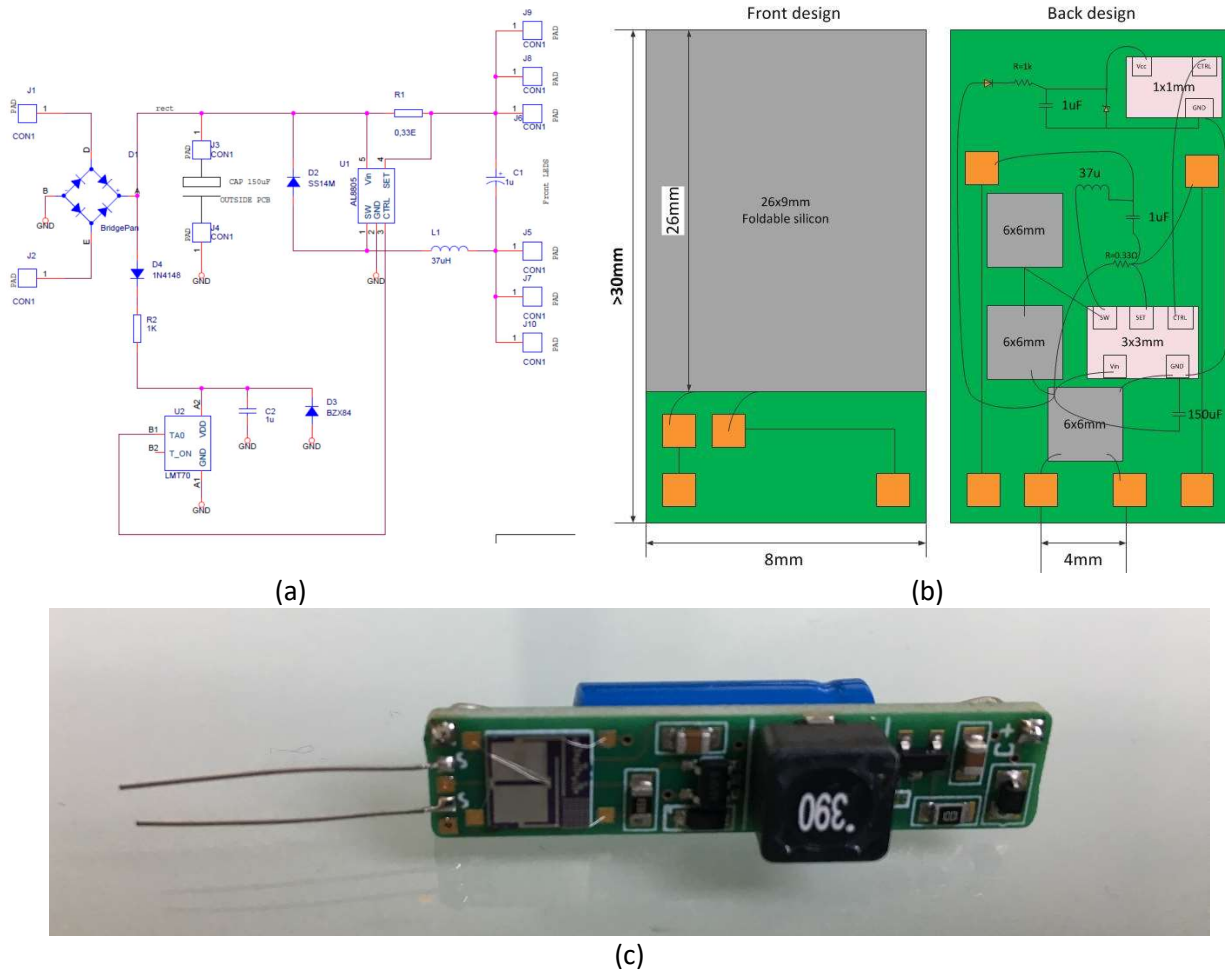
(a) Circuit layout of Buck driver. (b) PCB layout for connecting foldable silicon substrate of design B; (c) PCB prototype
